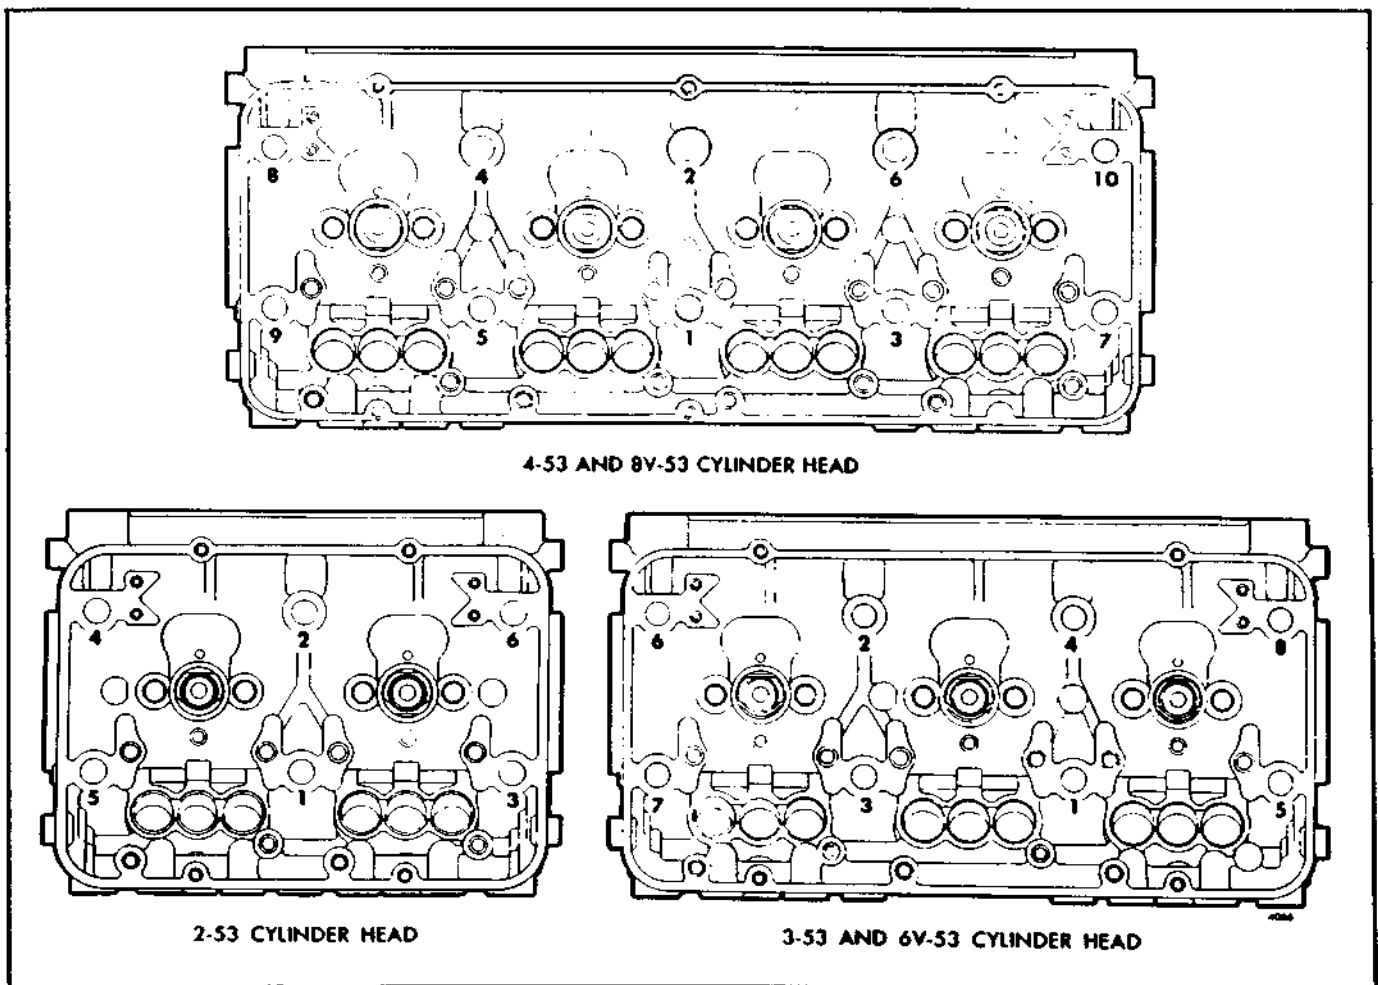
Sequence for Tightening Cylinder Head Bolts
